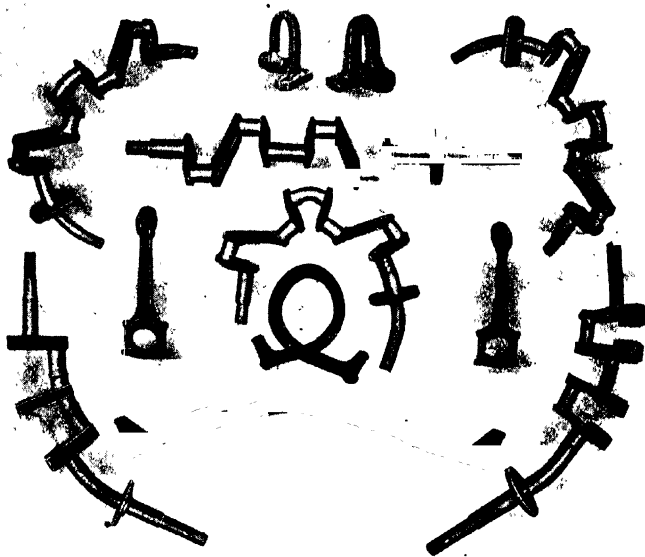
ILLUSTRATING TESTS TO DESTRUCTION OF DROP FORGINGS.
